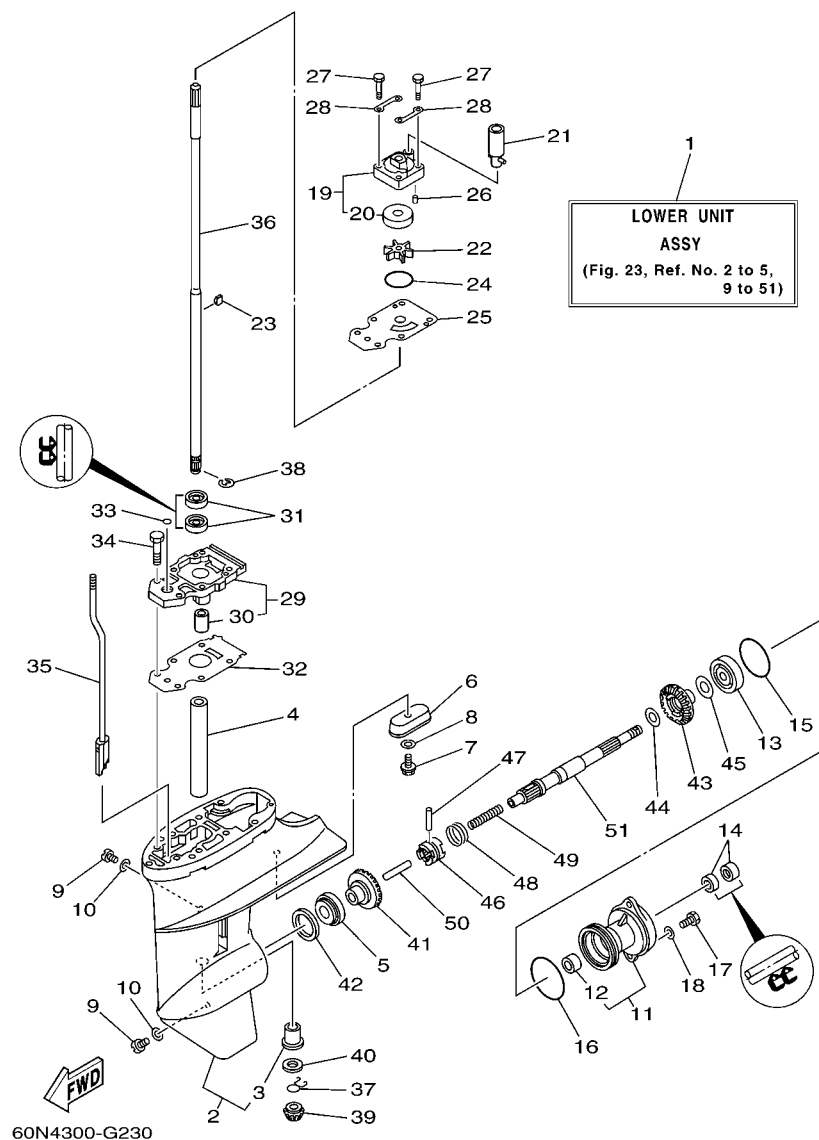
LOWER CASING & DRIVE 1 BOITIER D'HELICE TRANSMISSION1
